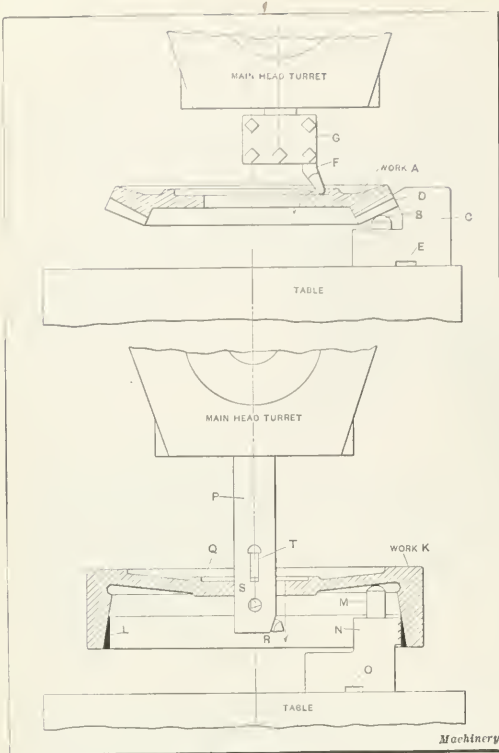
Methods of holding Automobile Bevel Ring Gear and Automobile Flywheel
